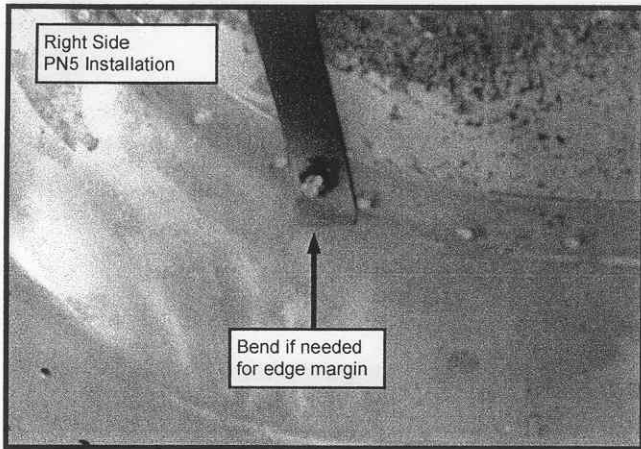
Installation Item No. 7, 9, 10, 11 & 12
